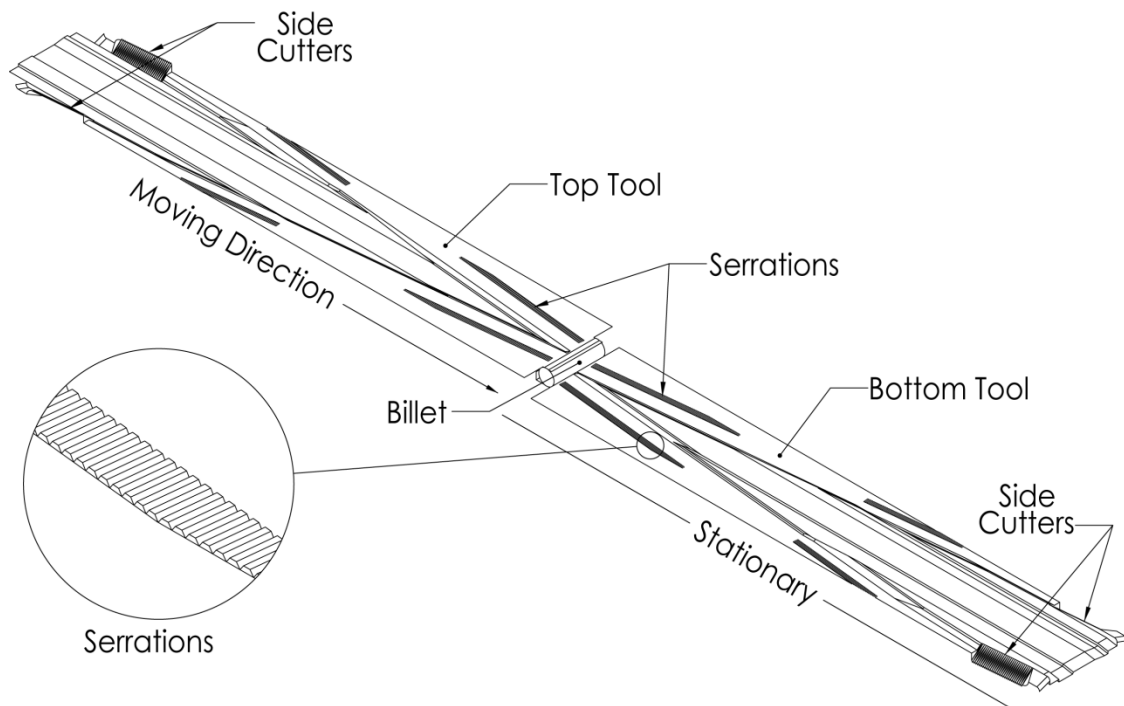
Assembly view of the complex tool geometry (Tool-3) used for the tractor shafts manufacturing by the Physical Technical Institute of NAS, Belarus.
